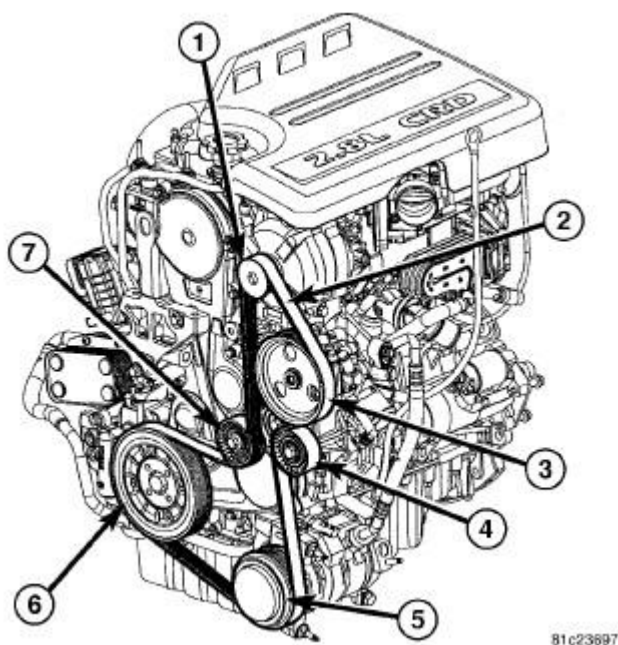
Accessory Drive Belt Routing - 2.8L Diesel
